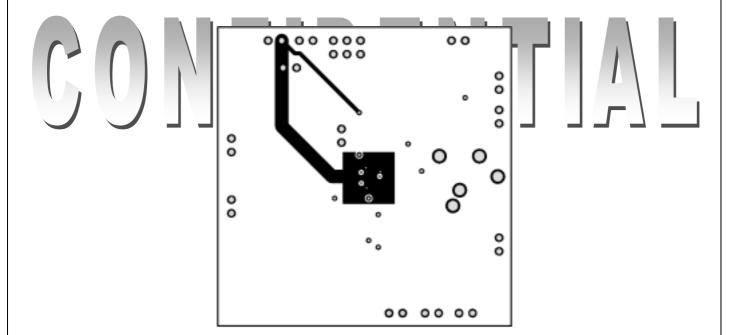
Recommended ITL PCB Layout Inner Layer 2
